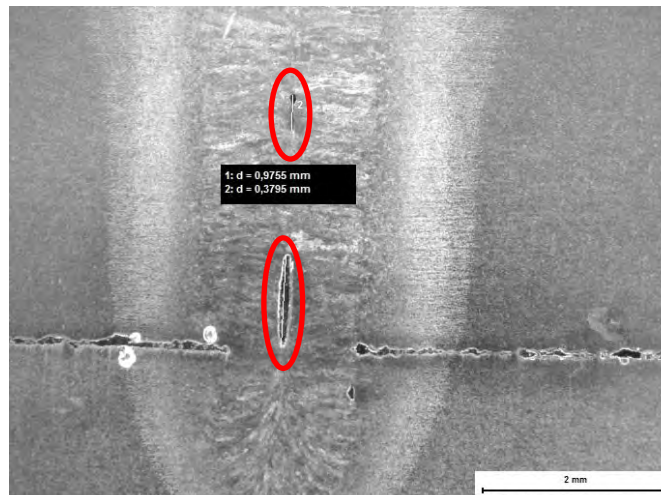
Right weld in Figure 35. Centre cracks are marked.
